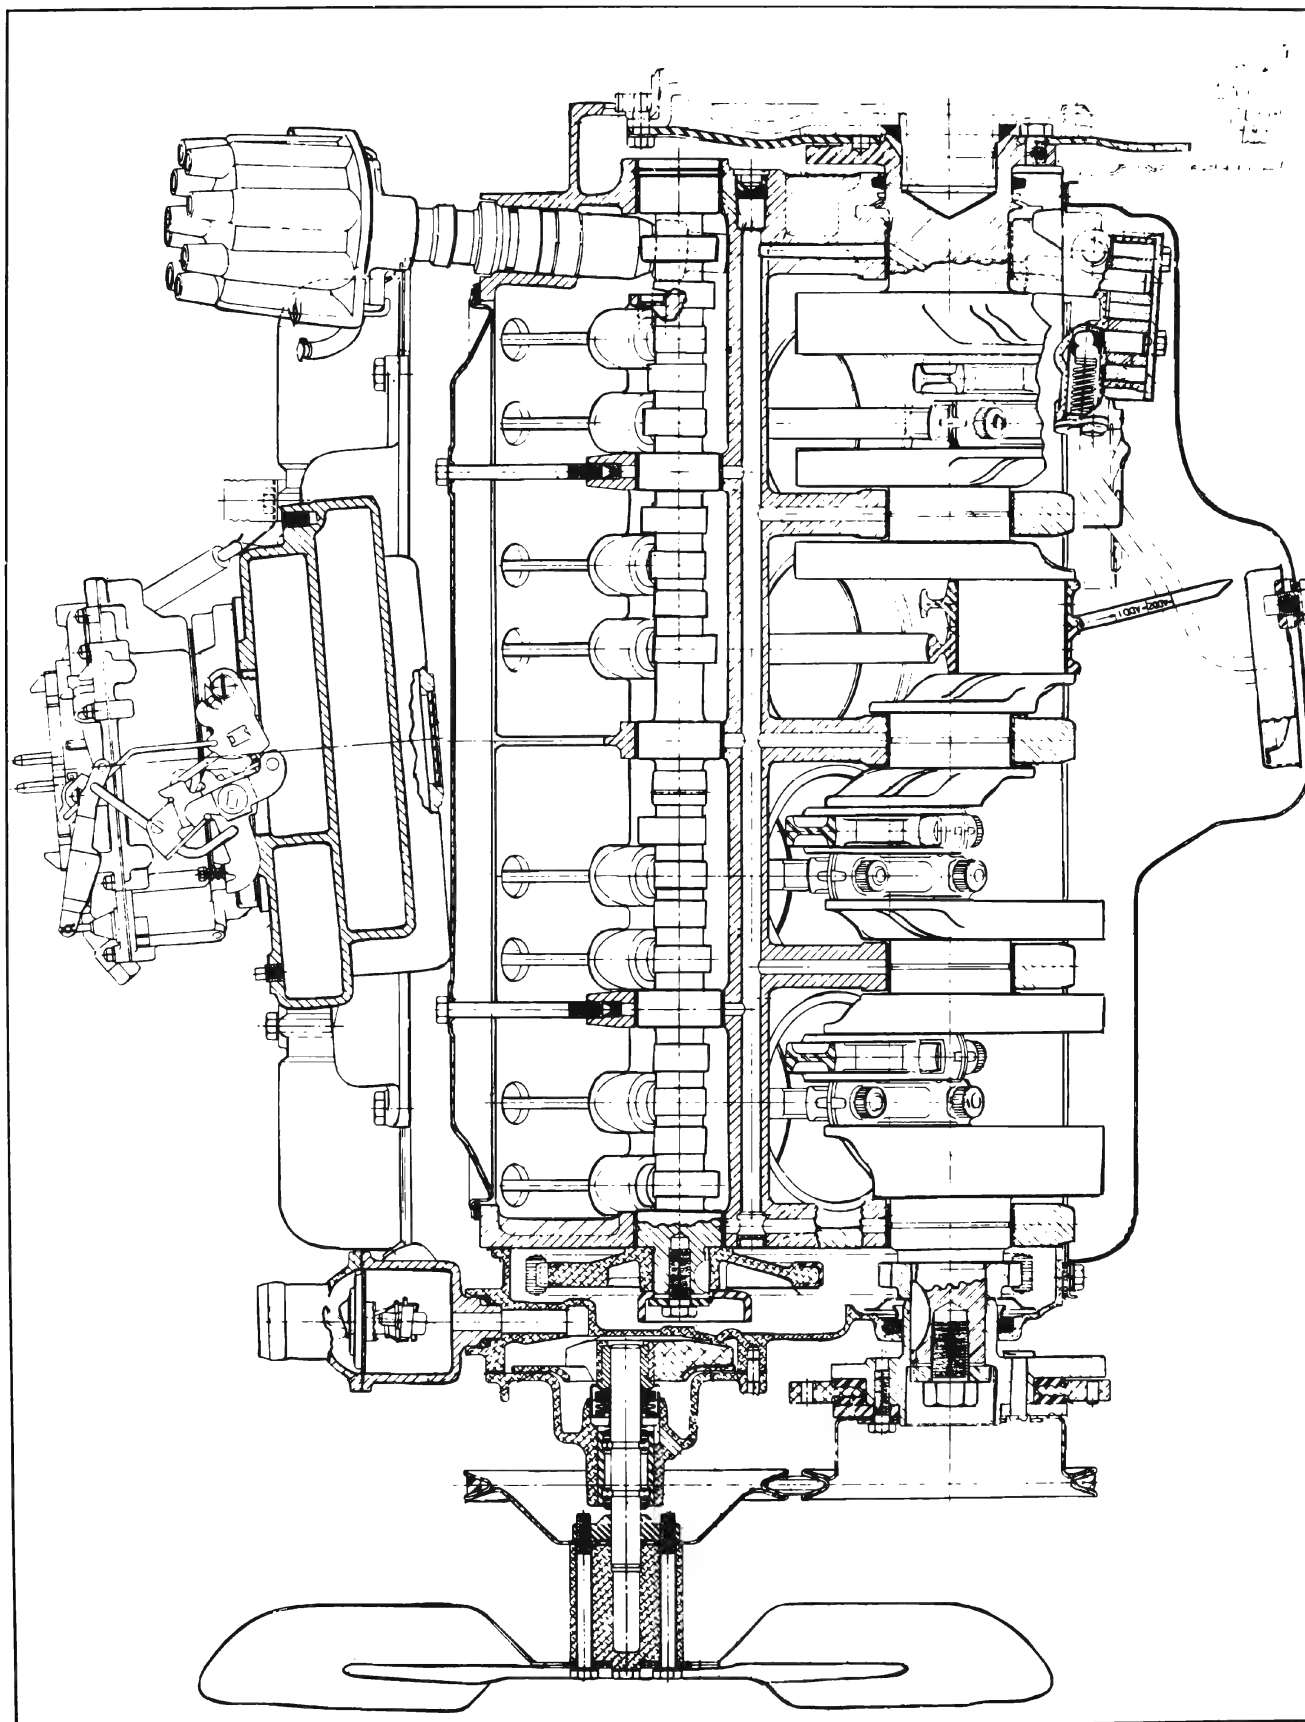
401 Cu. In. Engine Cross Sectional View
